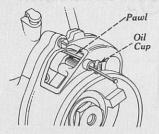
Illustration No. 23 Showing Method of Lifting Pawl for Locking Impulse Coupling out of Engagement
